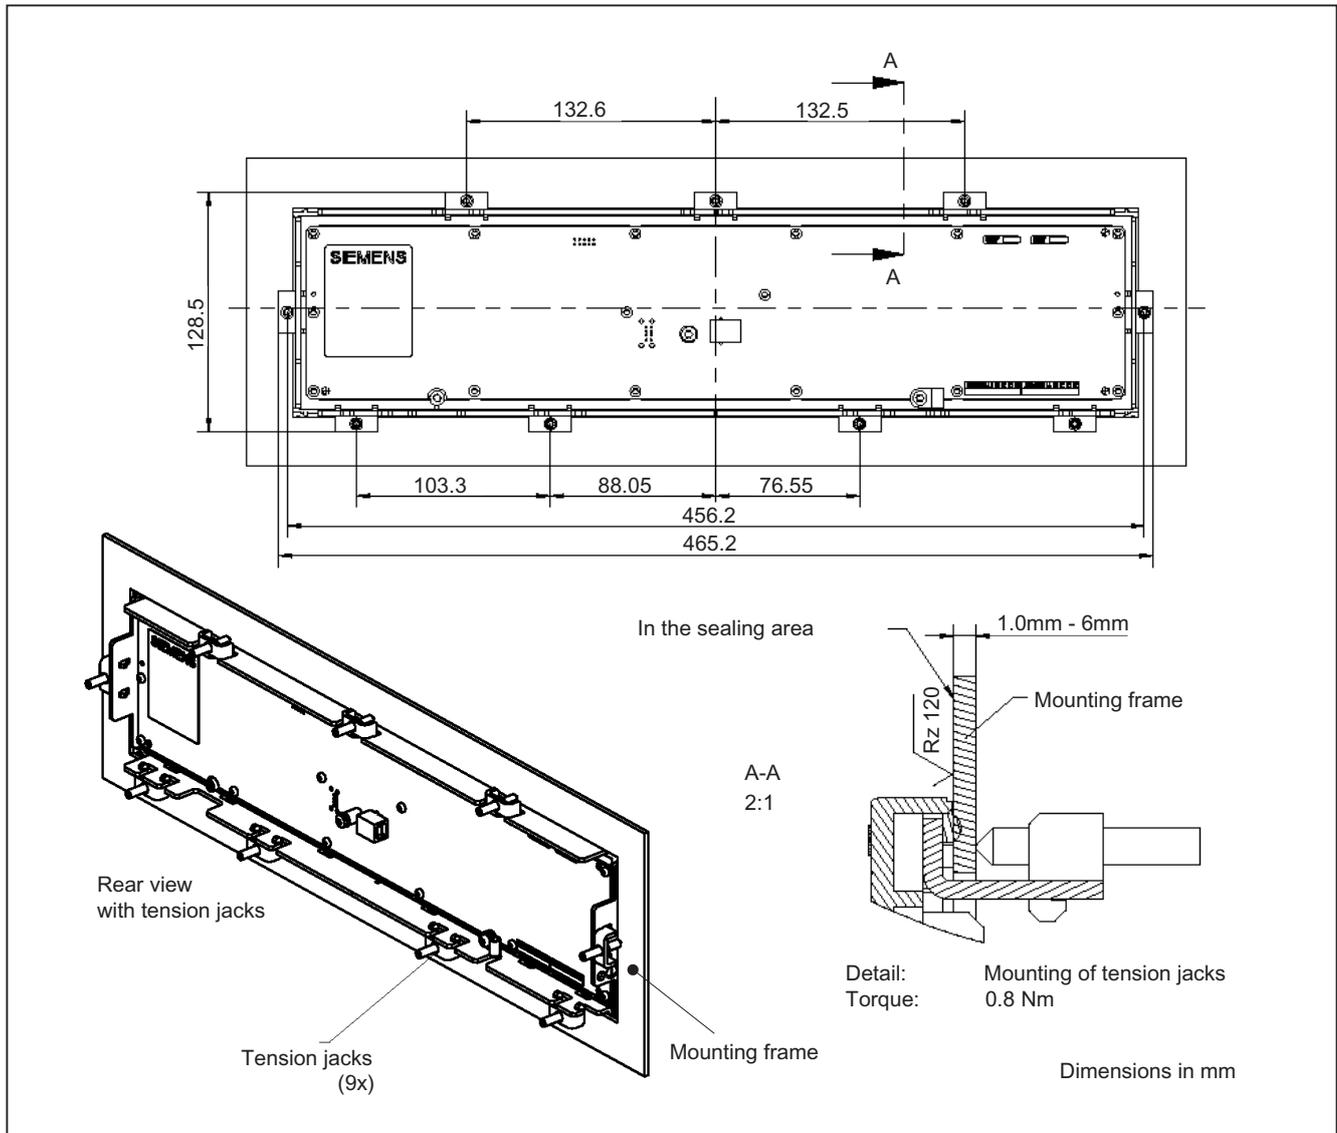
Dimension drawing for mounting the CNC full keyboard KB 483C
